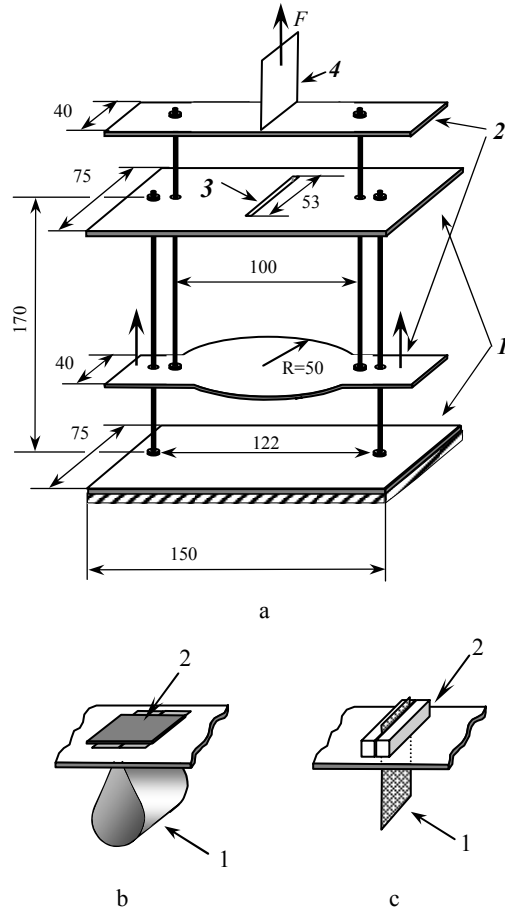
Scheme of the compression tester: a – construction of the device (linear dimensions are given in mm): 1 – lower stable block; 2 – upper movable compressing block; 3 – aperture for fixing the specimen; 4 – plate for fixing compressing block to the upper clamp of tensile tester; b – fixing scheme of loop shaped specimen in an aperture: 1 – specimen; 2 – fixing plate; c – fixing scheme of plate shape specimen in an aperture: 1 – specimen; 2 – magnetic clamps
